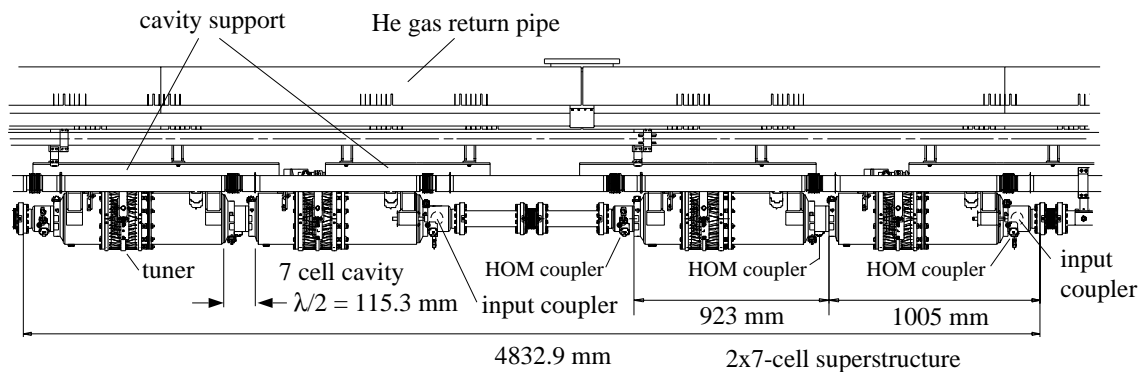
Layout of the inner part of the cryomodule, housing two 2×7 -cell prototype superstructures. This cavity chain will be used for a proof of principle experiment at the TTF linac.
